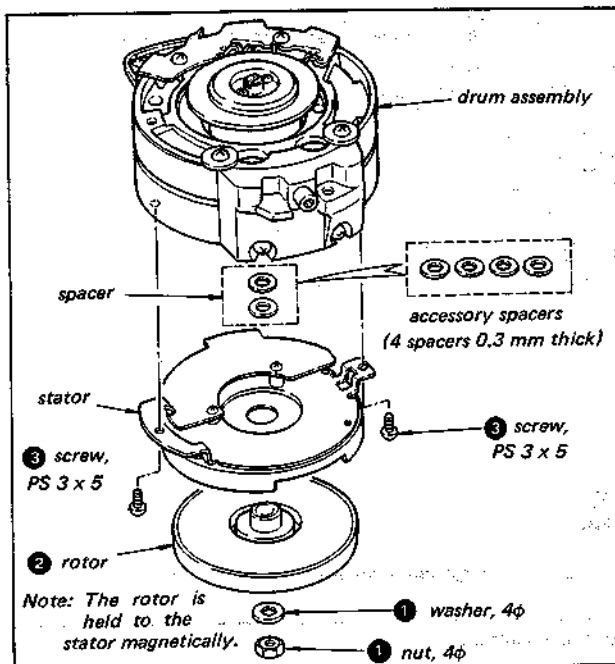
Removal of the stator and rotor when replacing the drum
